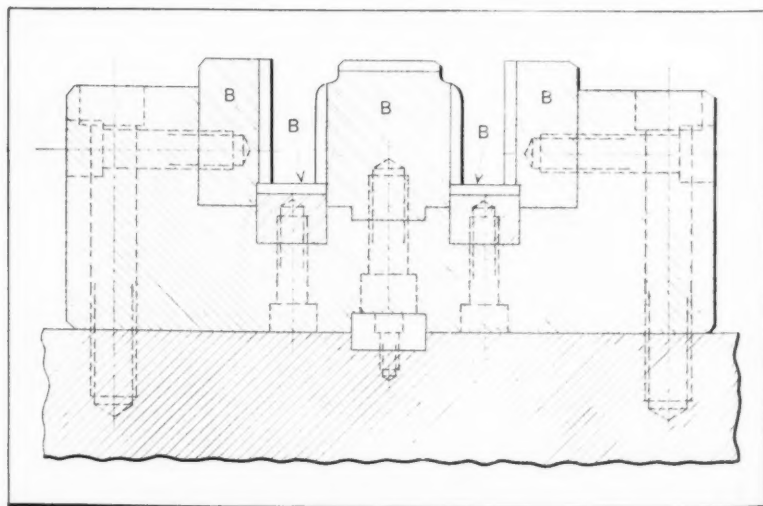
Hydraulically Operated Fixtures and Duplex Built-up Broaches are Used in Broaching Part Shown in Fig. 2
